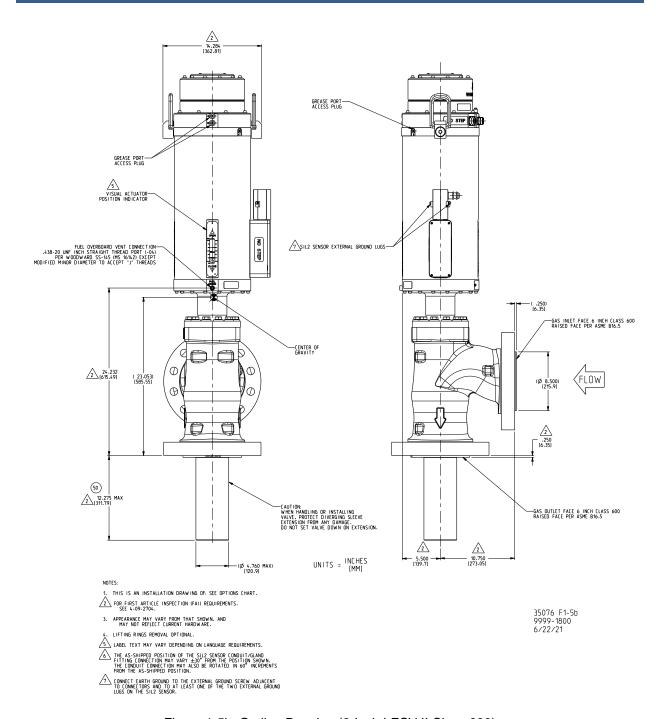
Outline Drawing (6-Inch LESV II Class 600)
